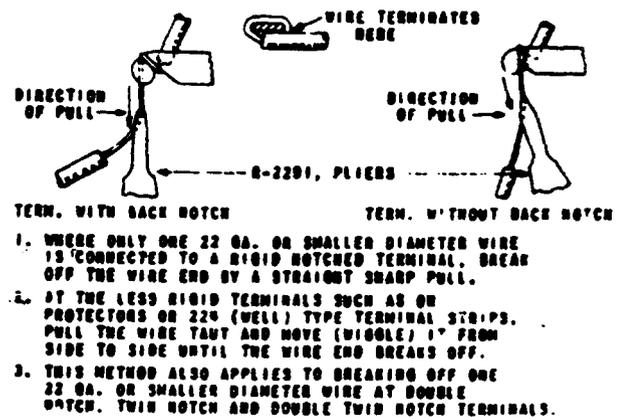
PLIER CONNECTED SURFACE WIRING AT PERFORATED TERMINALS (PARS. 3.113, 3.12a, 3.12b, 3.14)
